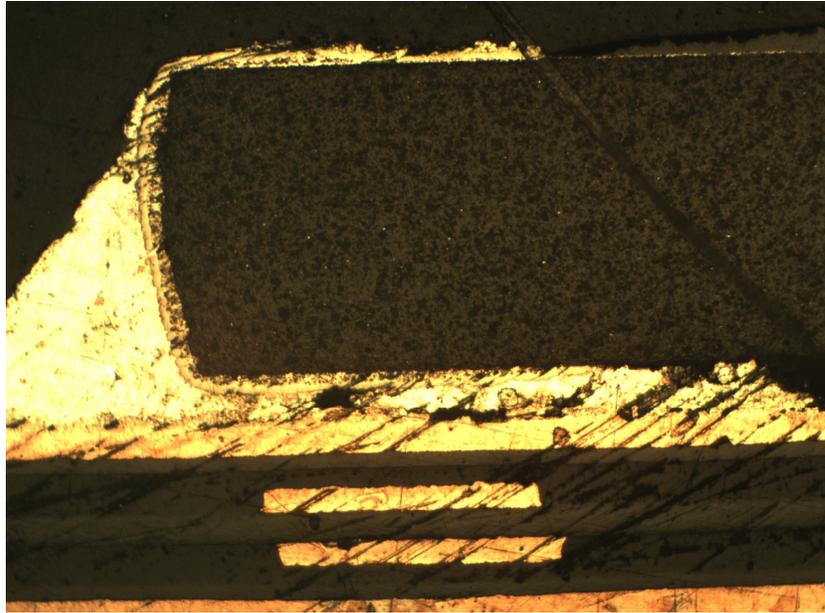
Hot Melt 1 on FR4 Test Board 2512 Resistor Image
